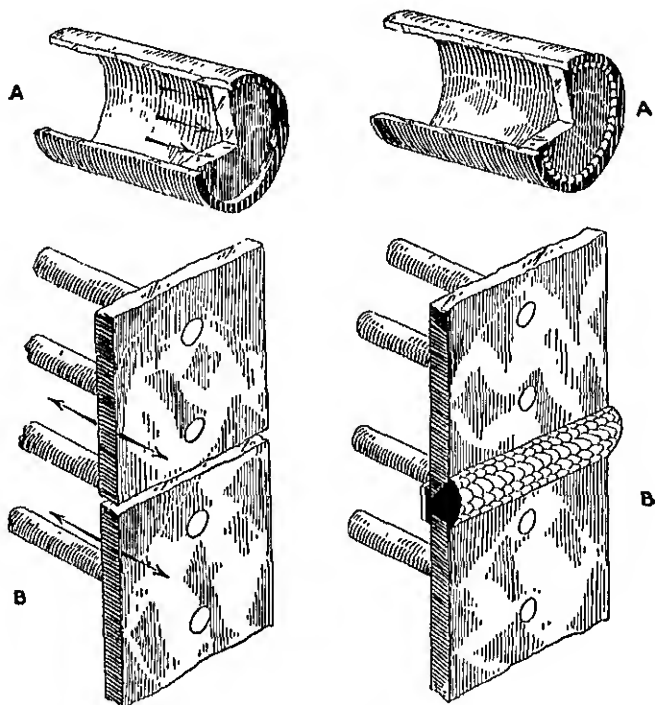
Pipe Heading and Firebox Sheet Work.
